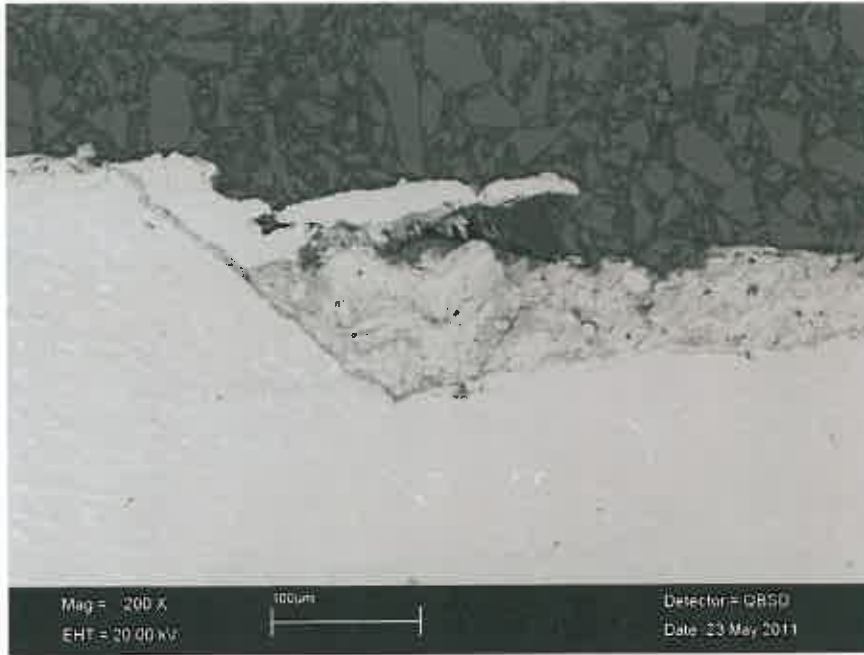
SEM-photo in 200X shows that the bottom of the machining step between the original seal and the repair weld is considered to be a sharp corner.
